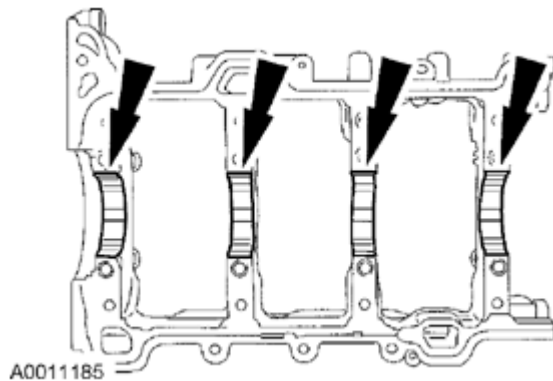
Locating Main Bearings In Lower Cylinder Block
